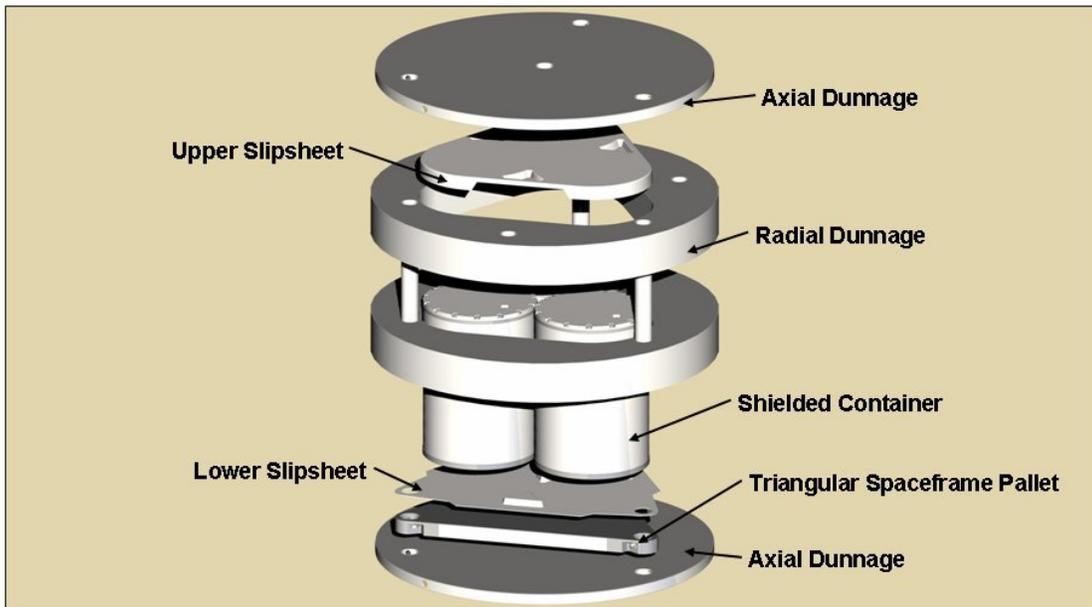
Shipping configuration (exploded view) showing dunnage used to cushion SCA packages inside the Type B HalfPACT to meet the HAC conditions.
